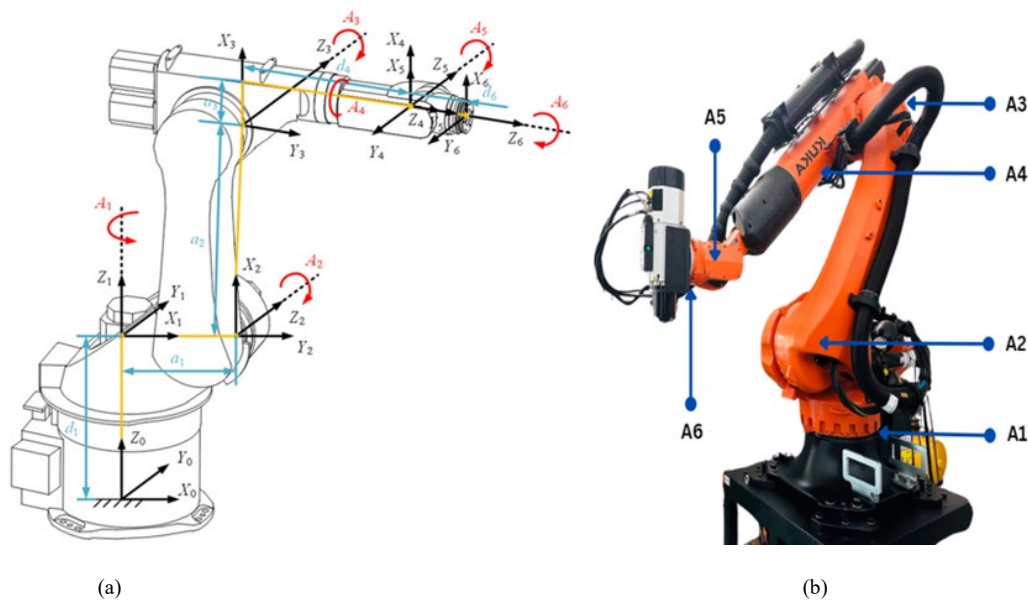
(a) Link frame of the KUKA Robot [22], (b) KUKA KR120 R2700 [23]
